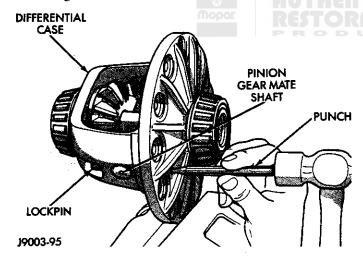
Pinion Gear Mate Shaft Lock Pin Removal
